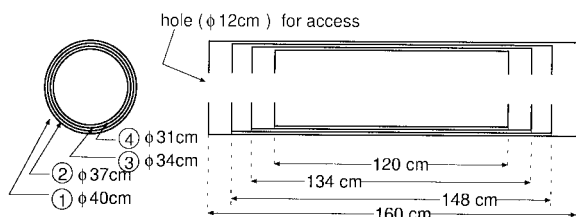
Geometry of the 4-layer cylindrical magnetic shield.
